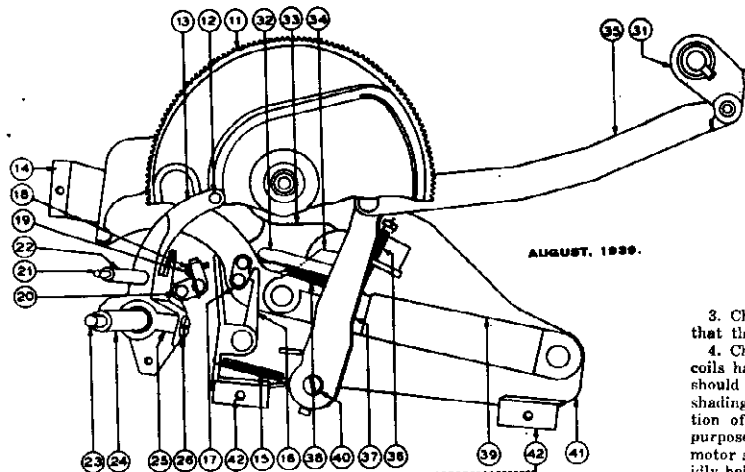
CUTAWAY VIEW SHOWING PARTS UNDER SUB-PLATE ASSEMBLY (83) FIG. 3
